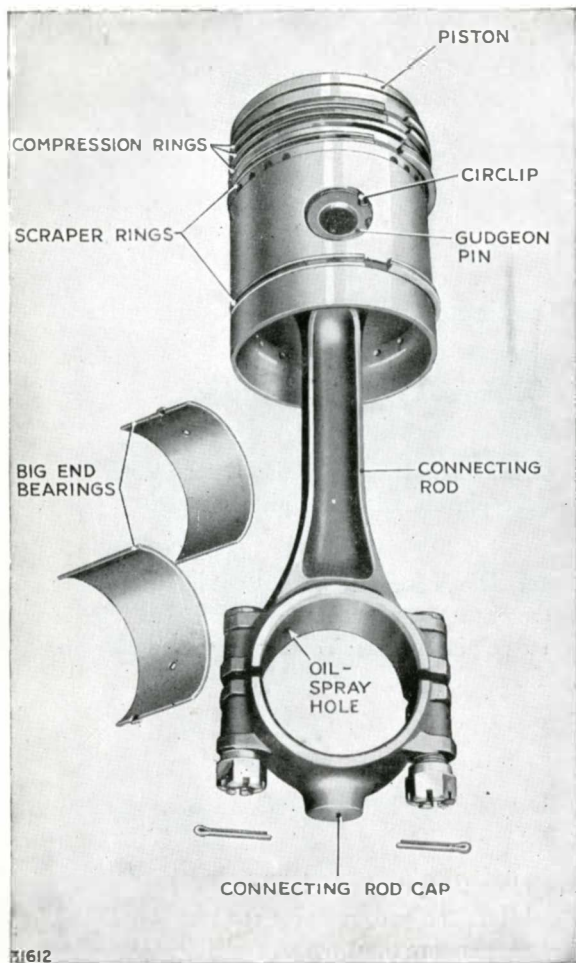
PISTON AND CONNECTING ROD ASSEMBLY
